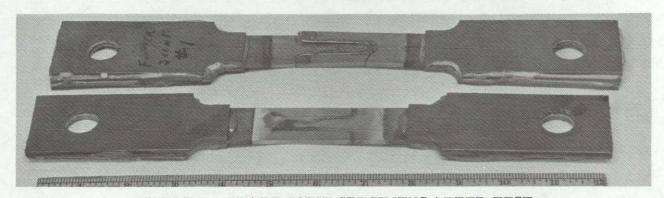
BRAZE JOINT SPECIMENS AFTER TEST
